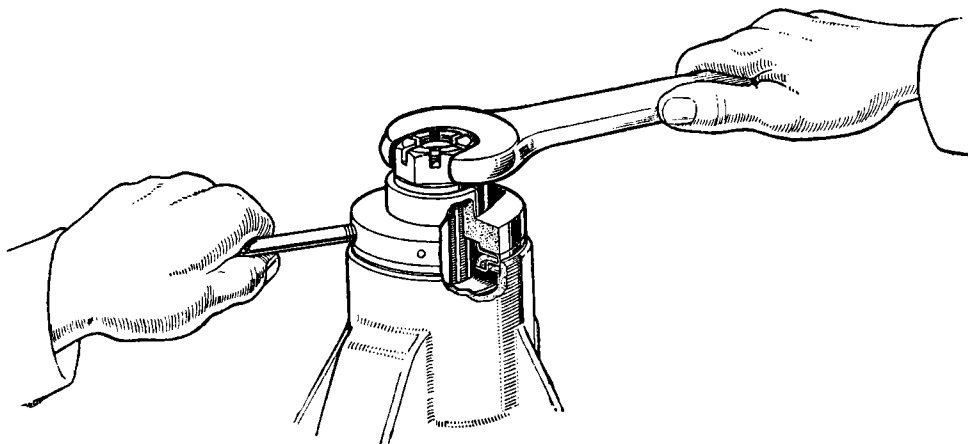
Fitting the pinion oil seal using Churchill Tool No. SL.4
